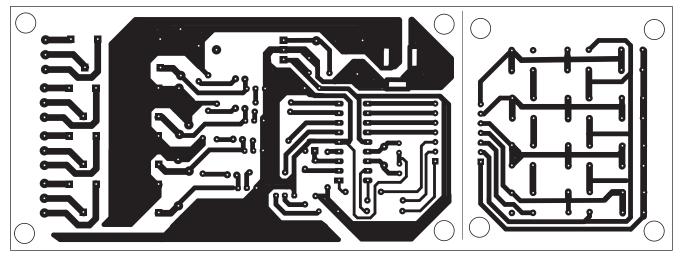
Actual-size, single-side PCB layout for PIC16F84-based coded device switching system
